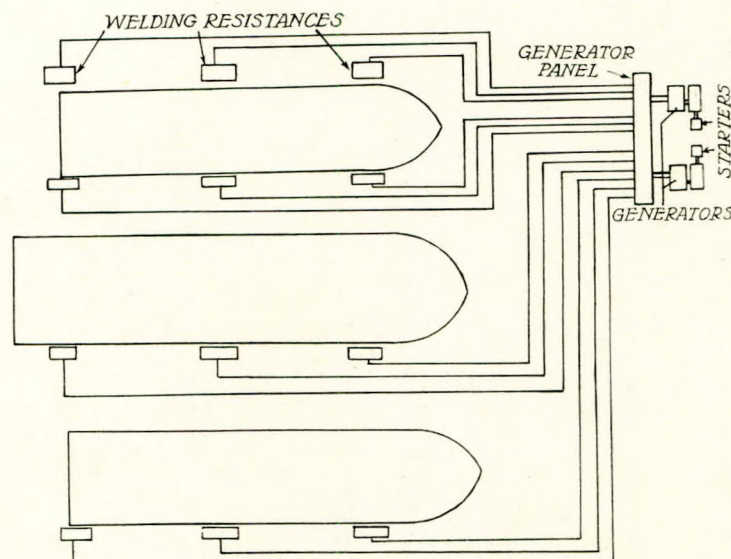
Plan of shipyard with two six-operator welding units.
